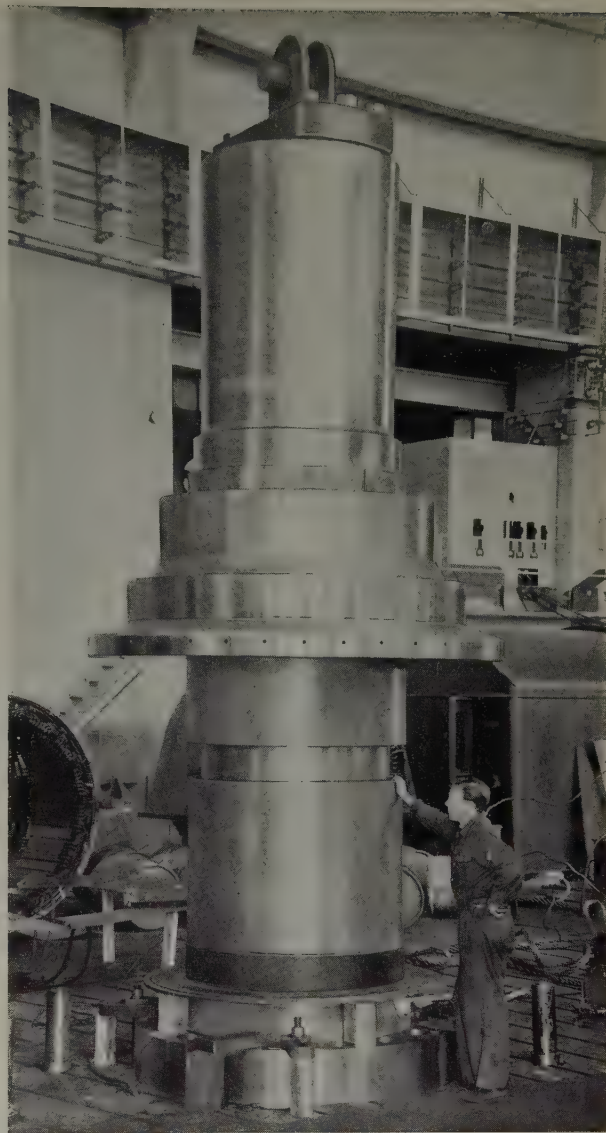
The main shaft with the thrust bearing runner. Diameter 1,150 mm (45 in.), flange diameter about 1,900 mm (75 in.), weight 57 tons including the thrust bearing runner. (51659)
